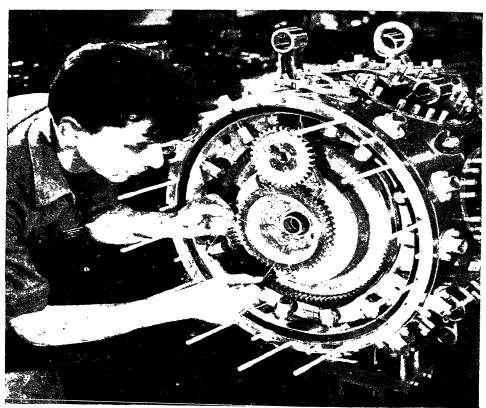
Finishing up the cam-ring installation on the rear crankcase of a double-row Wright engine.
